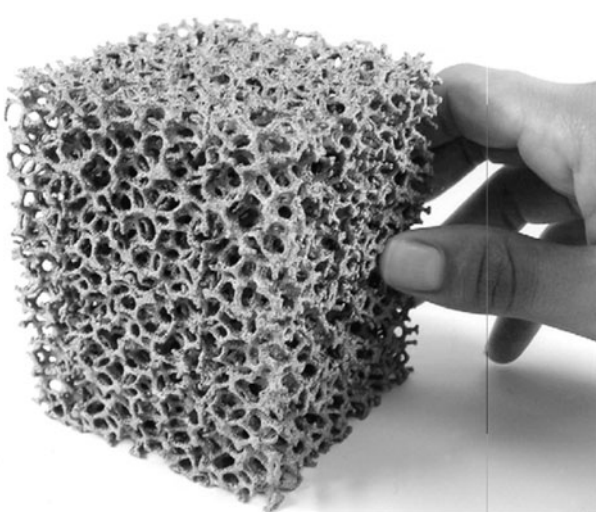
Example of an enlarged Ti6Al4V open cellular foam prototype fabricated using EBM (Source: [148])
